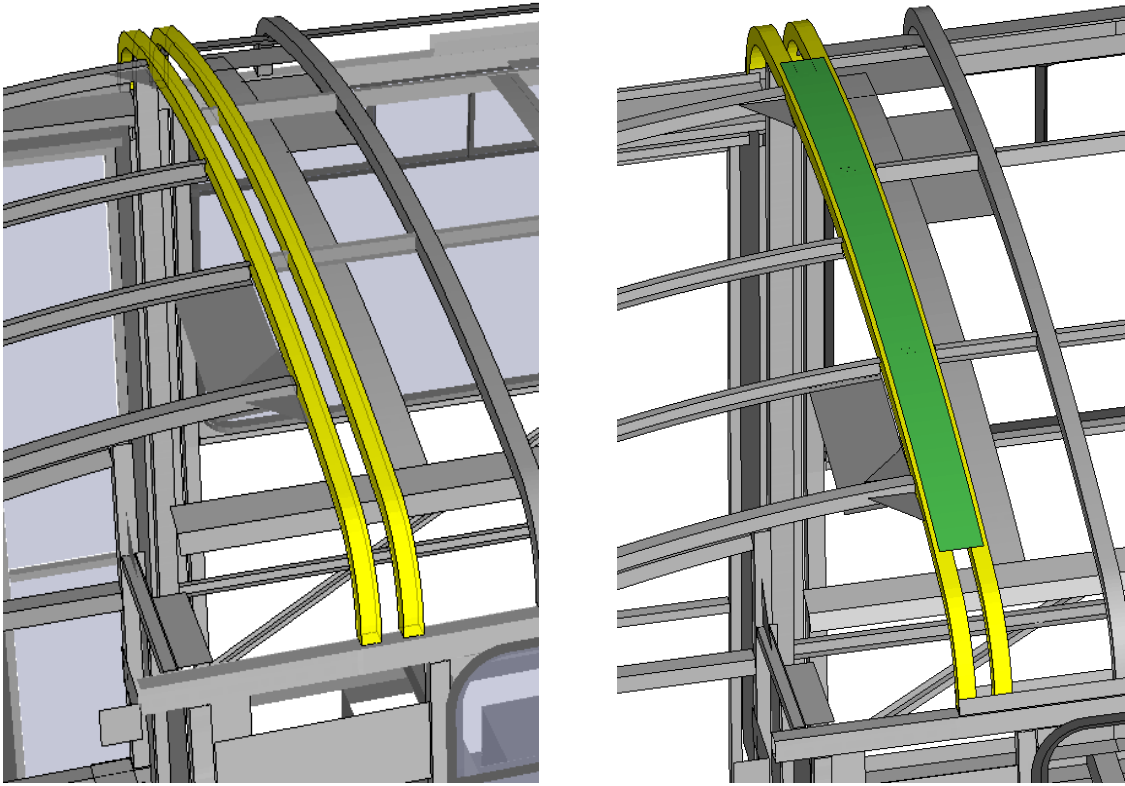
Original front roof bow structure (left), proposed 11 gauge steel plate (right).
